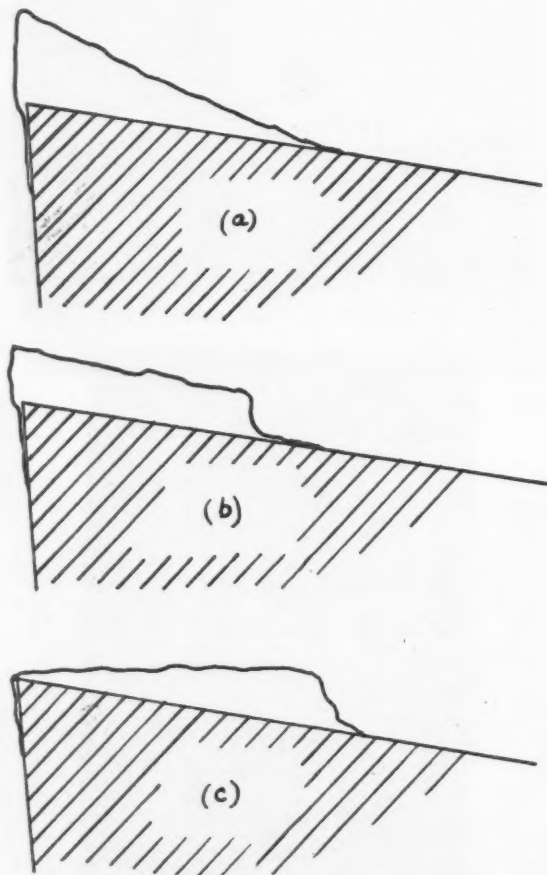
Forms of built-up edge on tools used for cutting cast iron.
